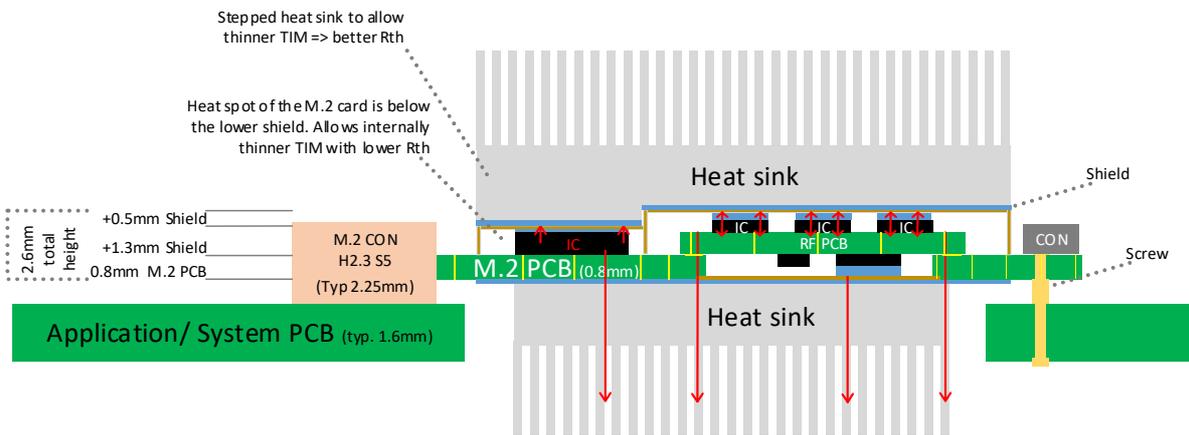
Option 3 - Heat sink on top of stepped shielding and directly on bottom of M.2 card PCB
